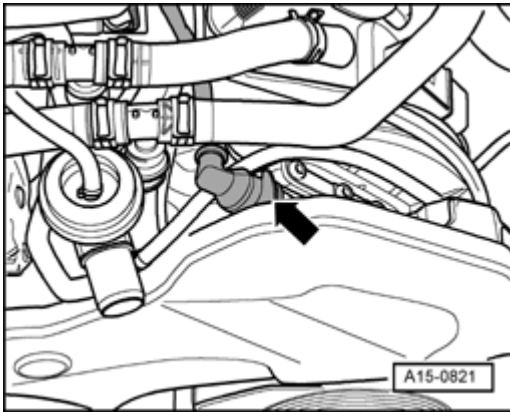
Disconnecting Electrical Harness Connector From Camshaft Adjustment Valve 2 N208
